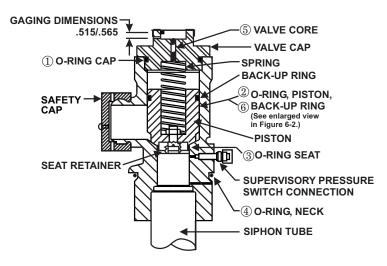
Valve Assembly (1½ in. and 2 in.)
